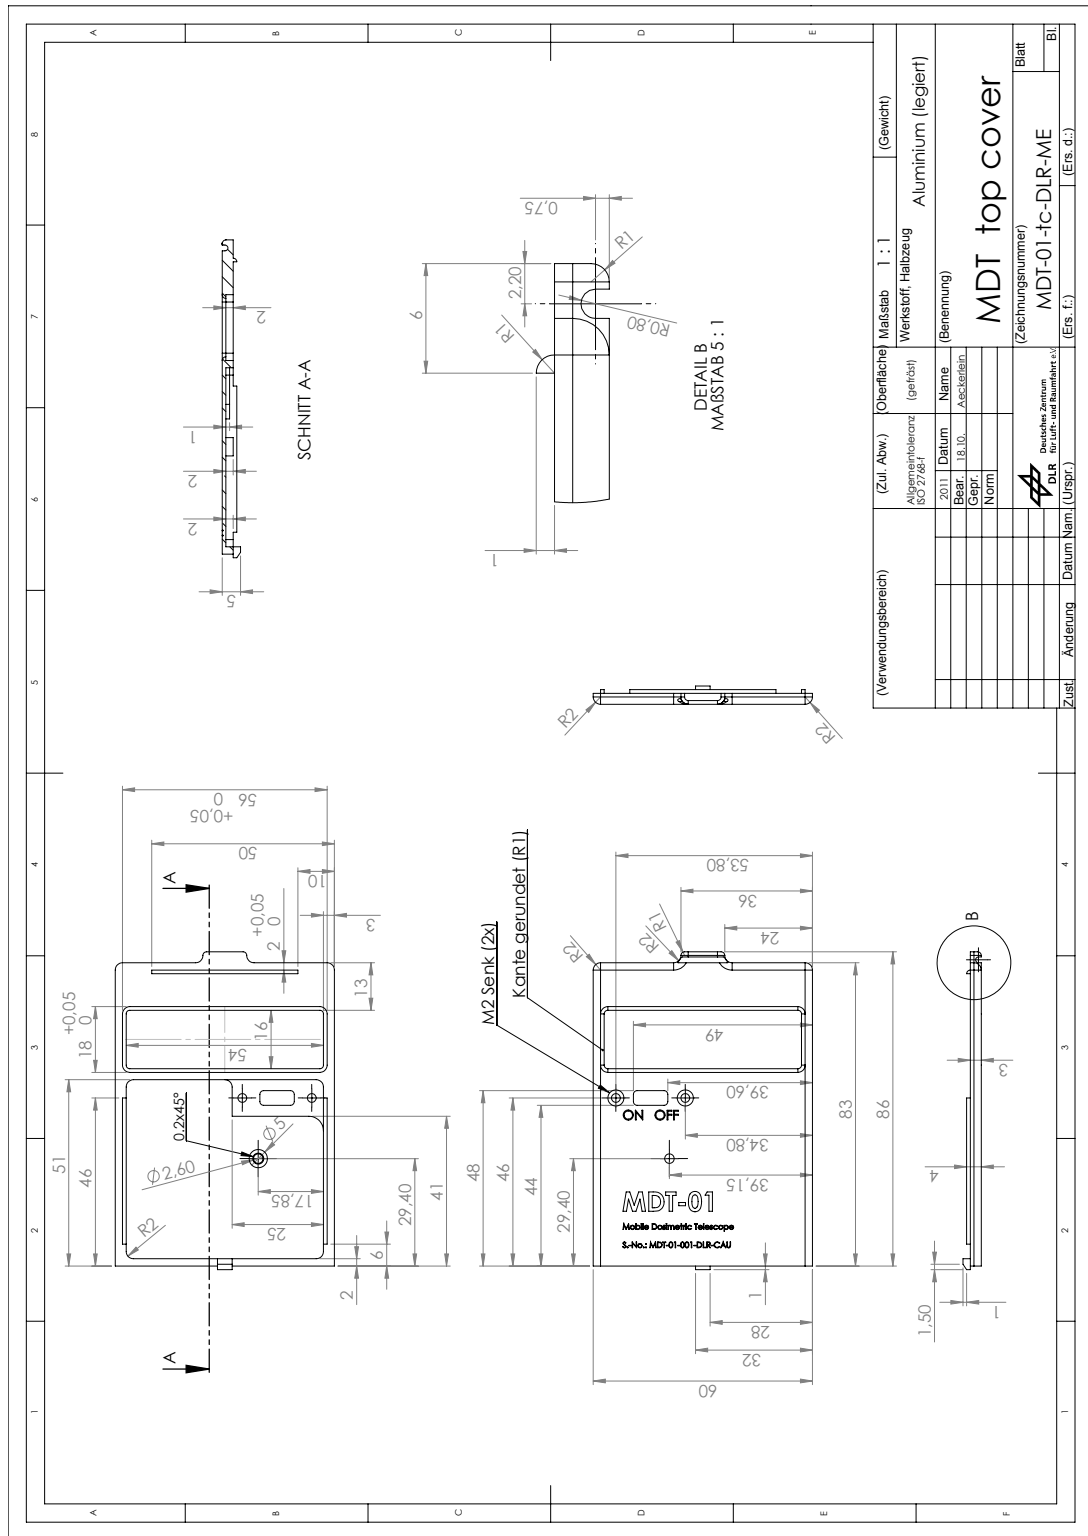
Technical drawing of the MDT-01-001 case – top cover (Section 3.5.2).
